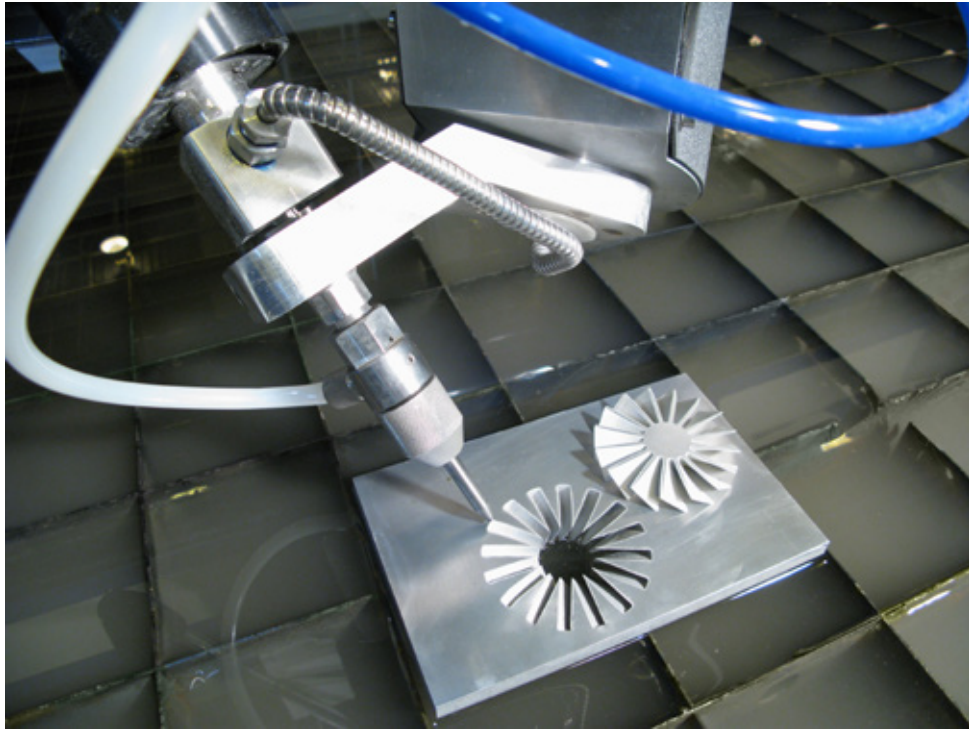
Five-axis waterjet cutting of a turbine blade
